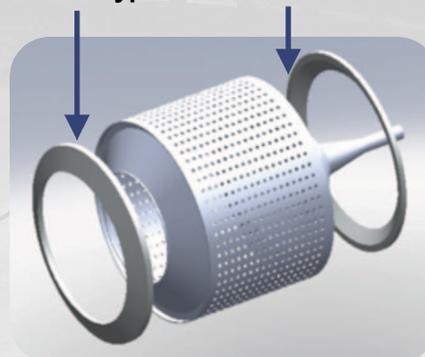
Prototype XYO balancers installed on front & rear of the washing machine basket
